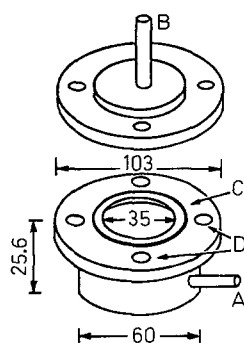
Exploded view of the continuous microreactor. A – Feed inlet; B – Outlet; C – O-ring; D – Butterfly screw valves (all dimensions are expressed in 10^{-6} m)
